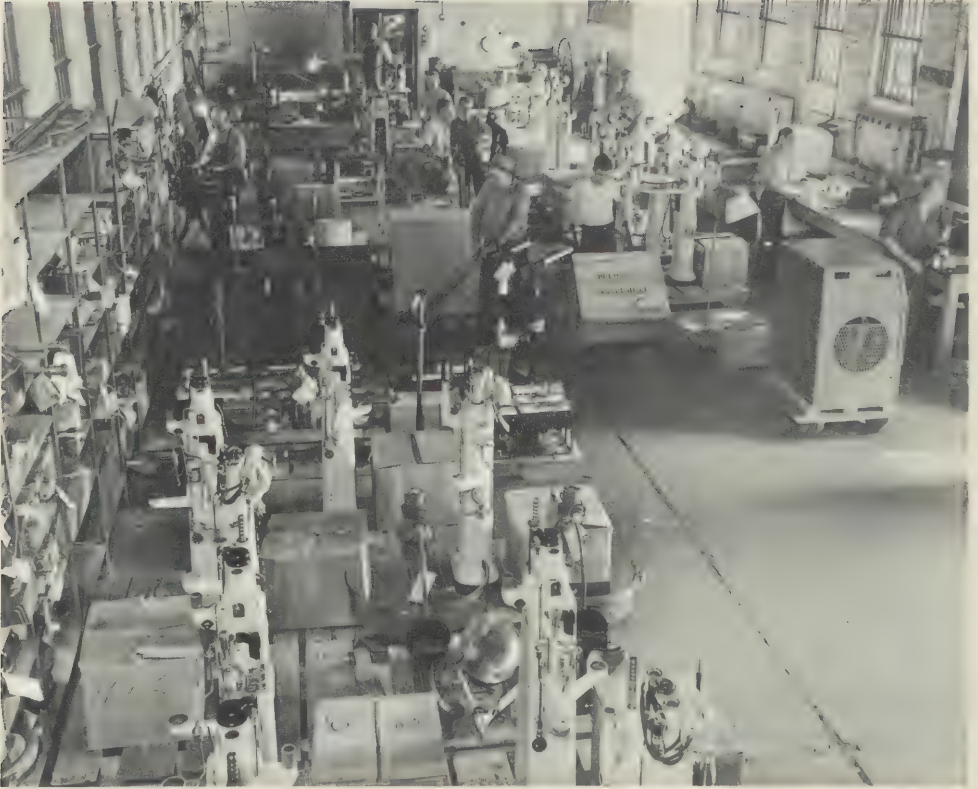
Section of fifth echelon repair shop after relocating in Building No. 18 on the Arsenal Reservation, St. Louis, Mo.
